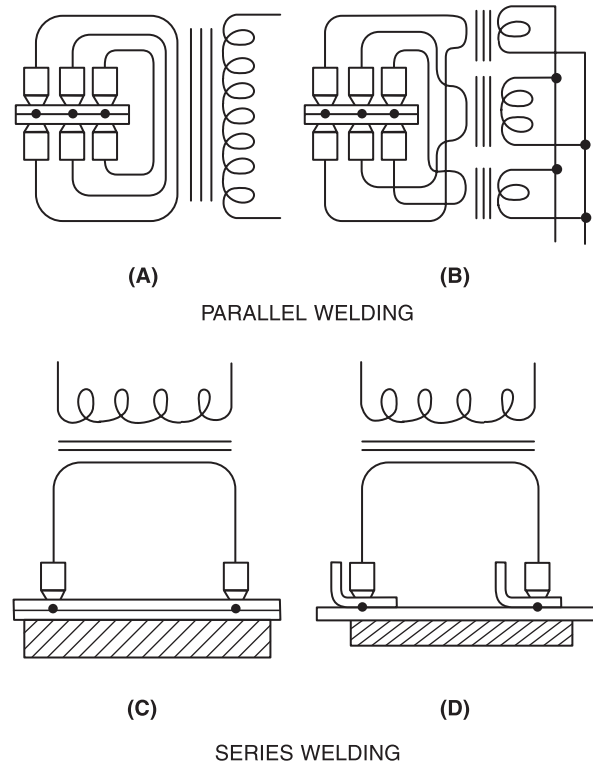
Typical Arrangements for Multiple Spot Welding
